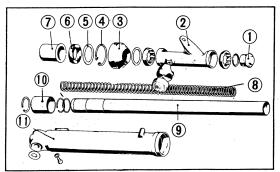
① Front fork bolt ② Front fork upper cover ③ Front fork dust seal ④ 44 mm circlip ⑤ Back SL100 up ring ⑥ 31×43×10 oil seal ⑦ Front fork pipe guide ⑧ Front fork spring ⑨ Front fork pipe ⑩ Front fork piston ① Front fork bottom case
